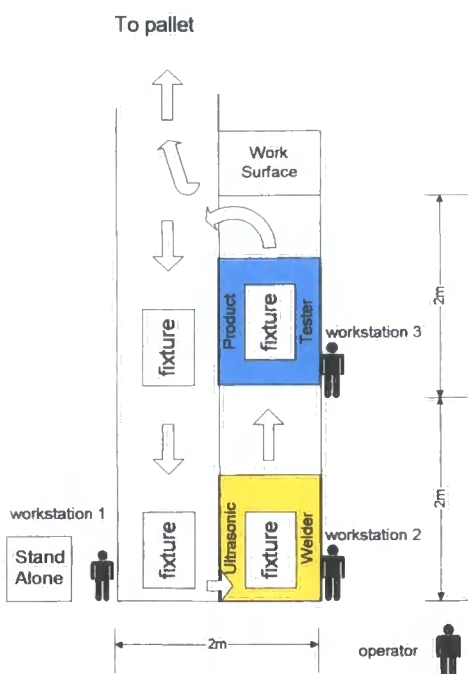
Assembly line layout for FourShellMiniTrim_welding
